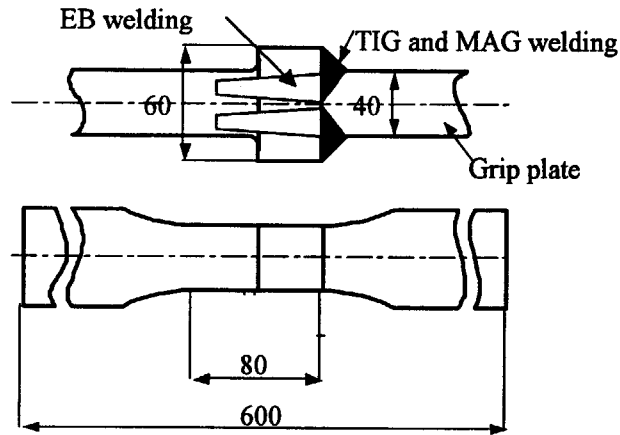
Welding joints used for a mockup fabrication
